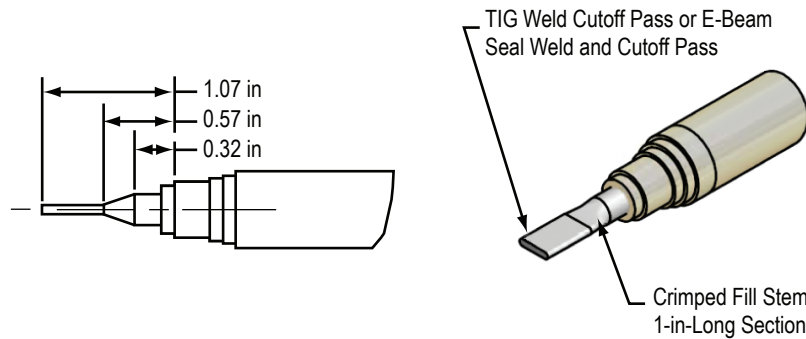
Pinch and seal weld option for heat pipe fill stem closeout.
